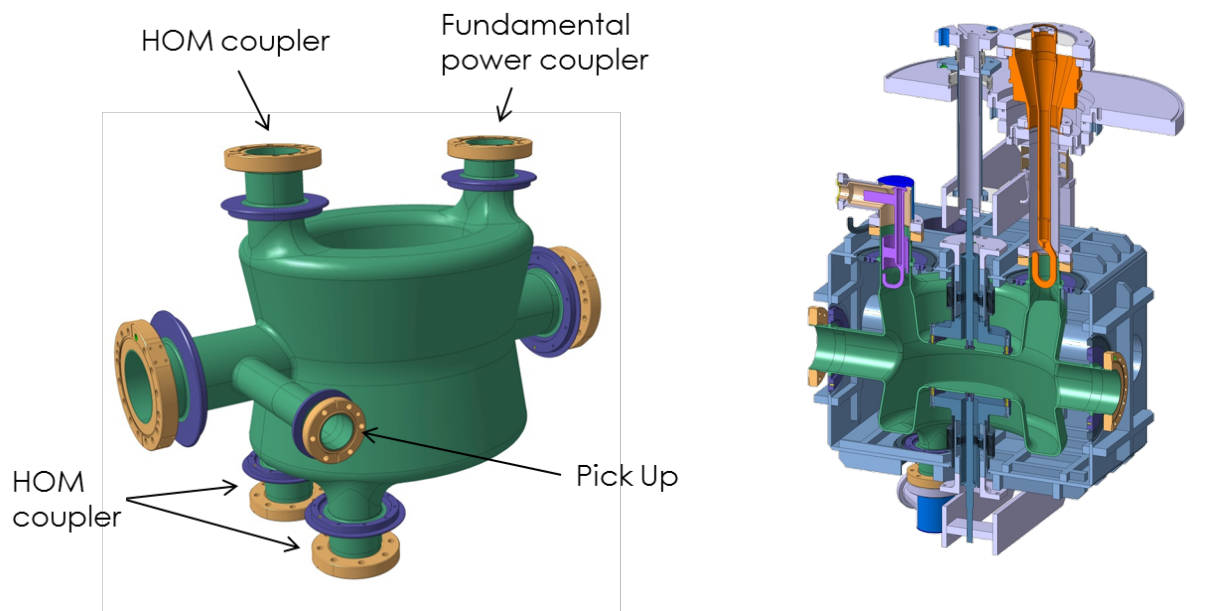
Left: DQW crab cavity for Hi-Lumi LHC; right: Cross-section view of the DQW crab
